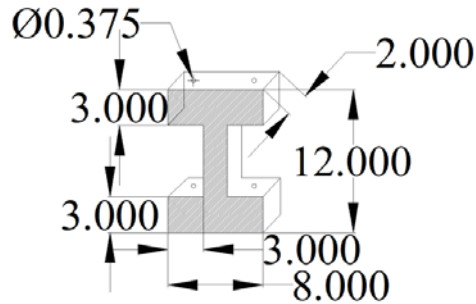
Uniaxial Fatigue "I-beam" Specimen Dimensions
